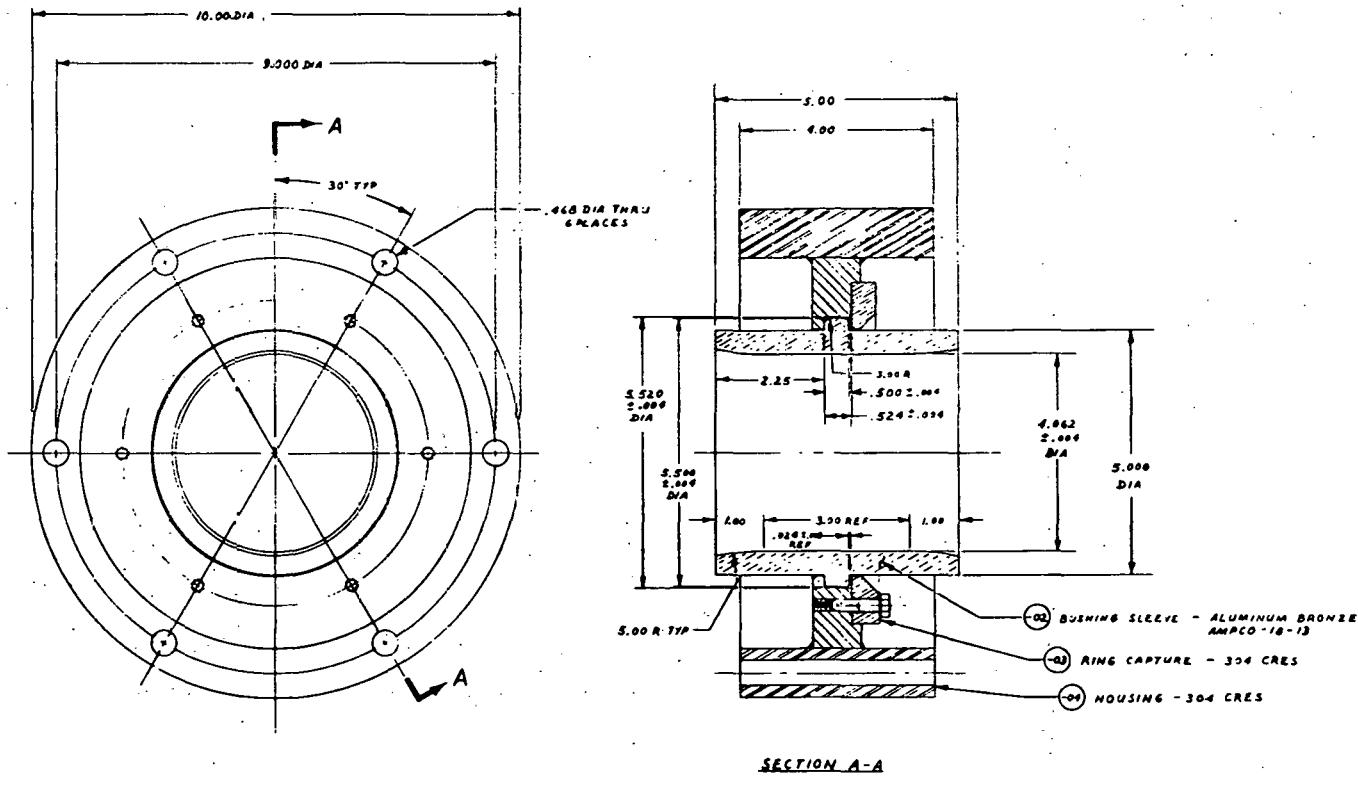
Bushing Guide Assembly (Dwg EX-N097241056)
